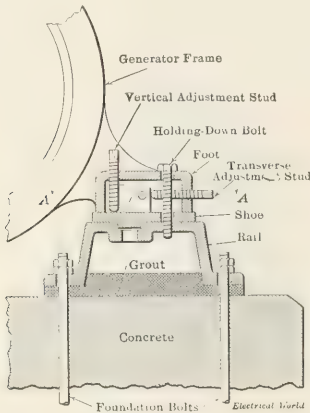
SECTION OF SHOE AND RAIL-ADJUSTING ARRANGEMENT
